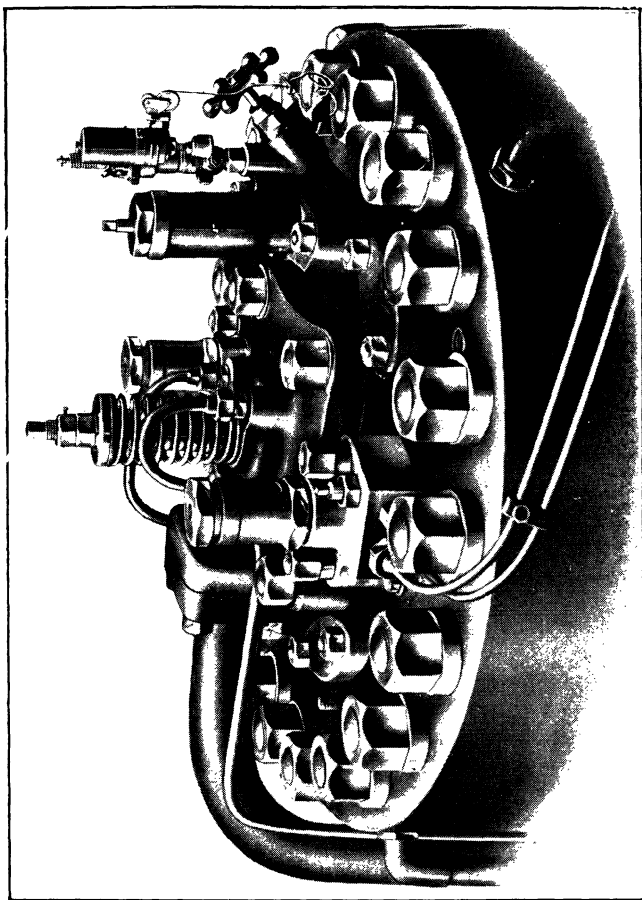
CYLINDER COVER OF R.W. OIL ENGINE—C. TYPE
